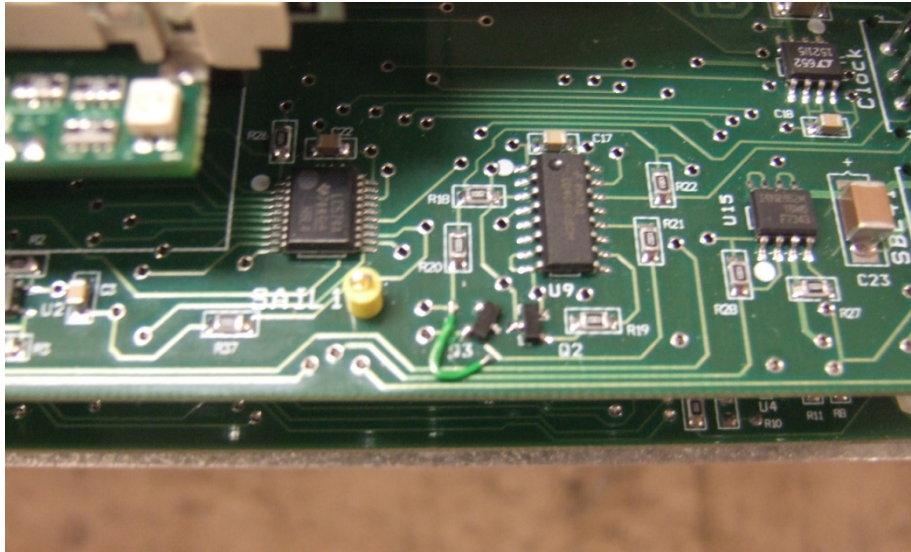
Broken solder joint at Q3 in Shearmeter 04.
